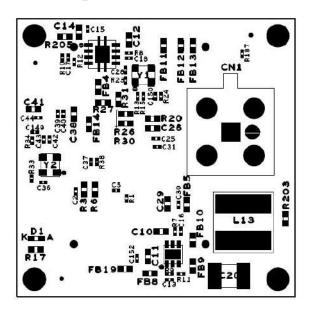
NileCAM20_CUNX Serializer Board Rear View
